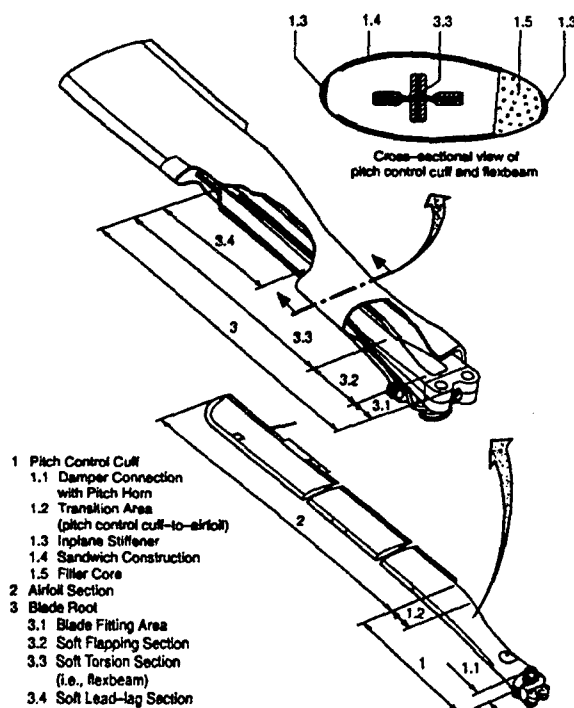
The Blade of the Bearingless EC135 Main Rotor
